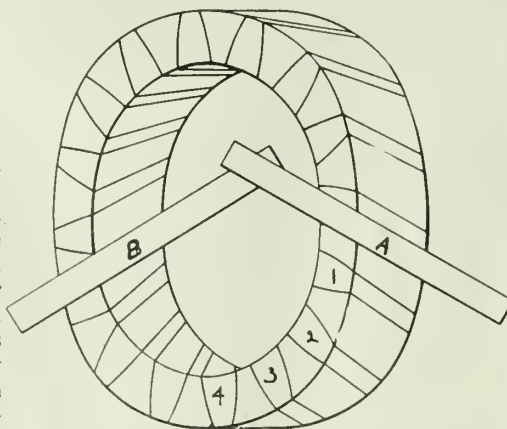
MARKING TEETH ON OUTSIDE WITH FLEXIBLE STRAIGHT EDGE A, AND INSIDE WITH B.
